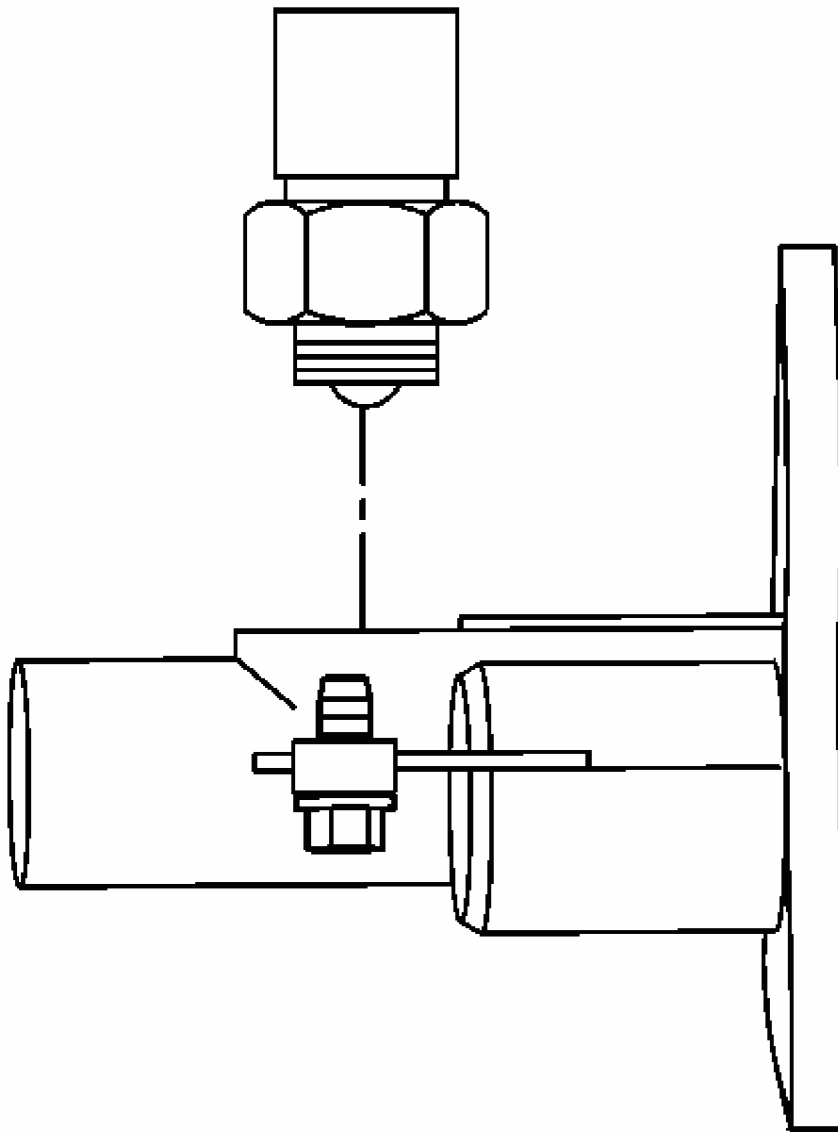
View Of Four-Wheel Drive Indicator Switch
